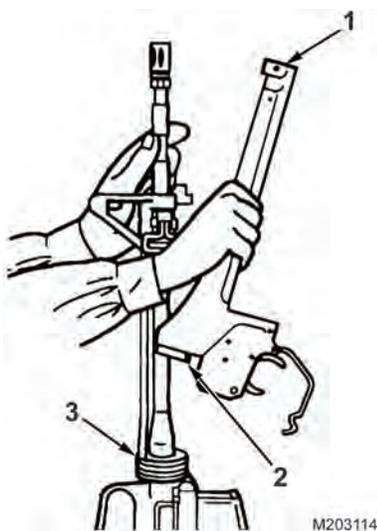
Aligning Receiver Assembly — M4 Carbine.
